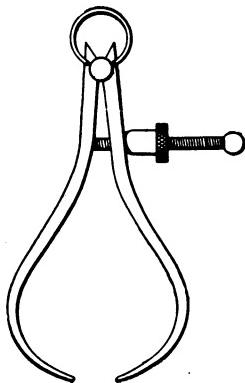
A pair of calipers that are adjusted with a nut and screw
